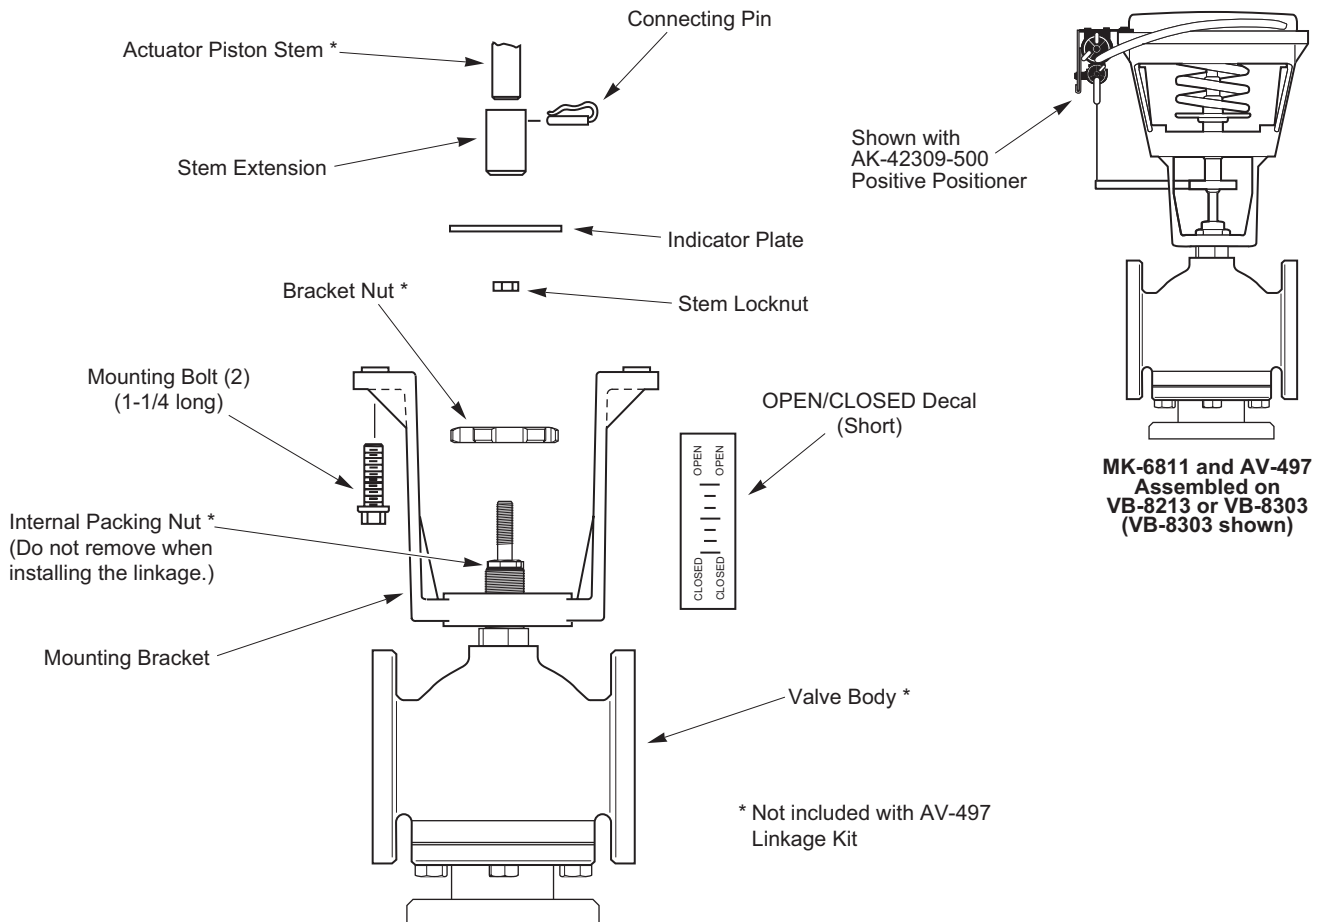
Valve Linkage Assembly for MK-6811 Actuator on 5" VB-8213 or VB-8303 Valve.
